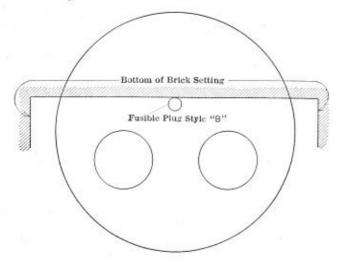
Horizontal Return Tubular Boiler Fusible plug to be located in rear head, not less than 2 inches above the upper row of tubes, and projecting through the sheet not less than 1 inch.
